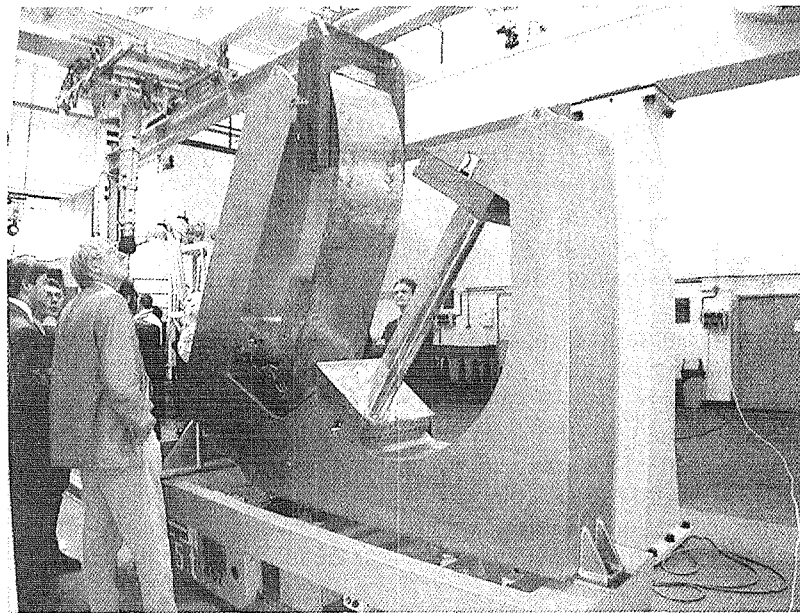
Integration prototypes mounted onto the outboard cassette
